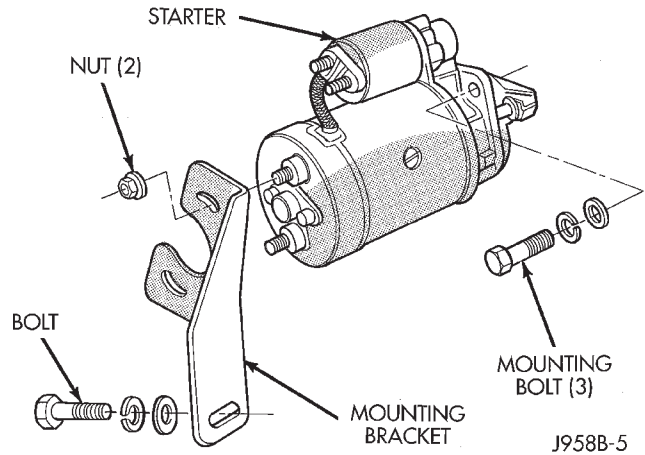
Starter Mounting - 2.5L Diesel Engine
